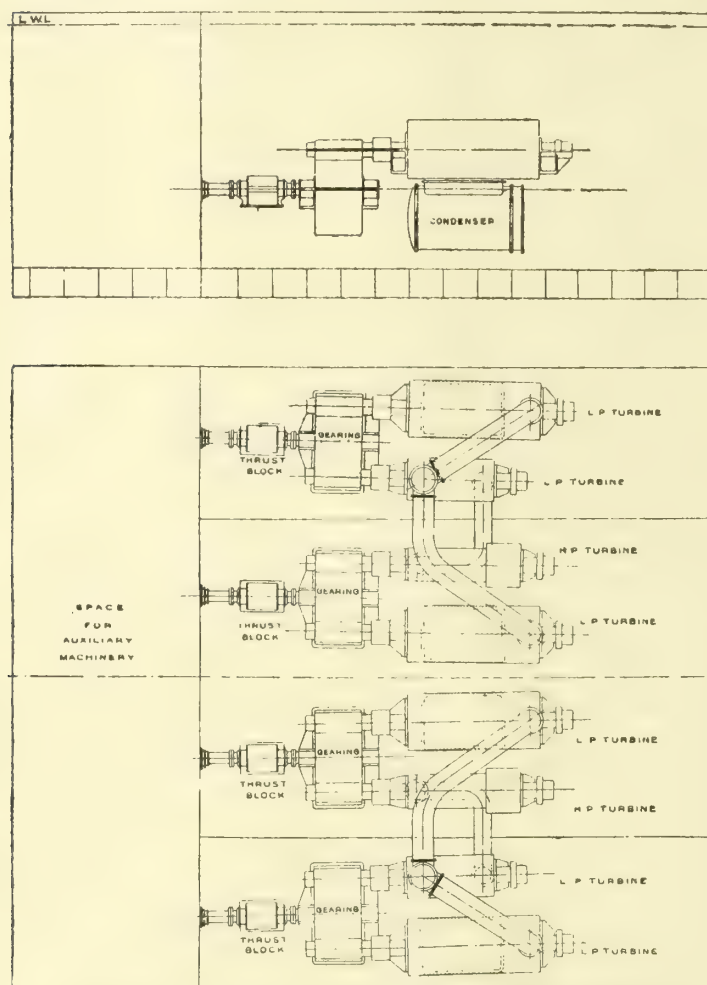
ELEVATION AND PLAN OF TYPICAL INSTALLATION OF GEARED TURBINE MACHINERY FOR A BATTLE-SHIP.
